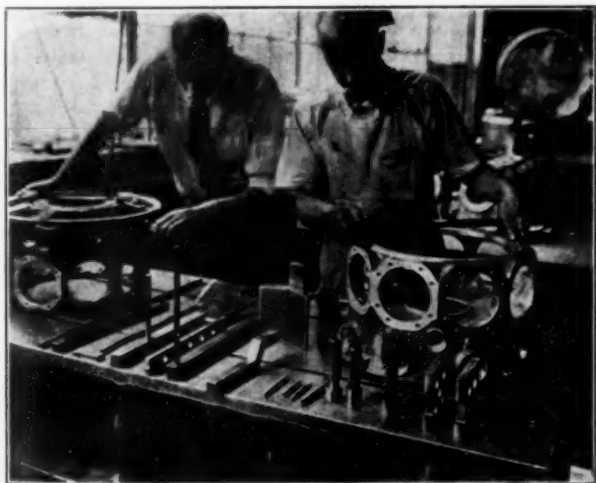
100 PER CENT FINAL INSPECTION AFTER ALL MACHINING OPERATIONS AND ENAMELING BEFORE MAIN CRANKCASE IS DELIVERED TO FINISHED STORES
